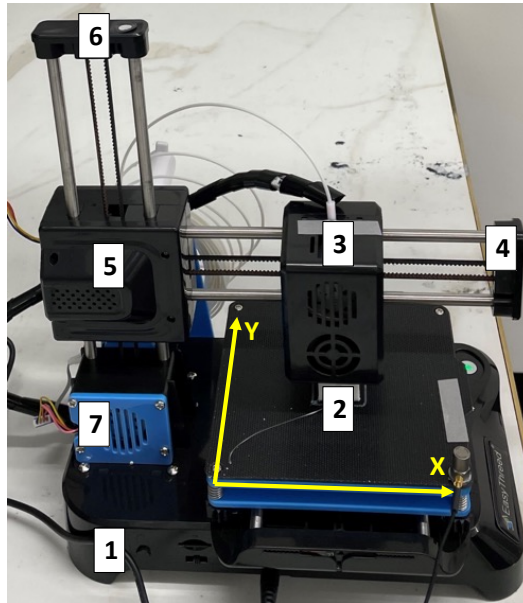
Primary components of an EasyThread K7 3D printer: 1. Base frame. 2. Build plate. 3. Print head. 4. x-axis gantry. 5. x-axis motor housing. 6. z-axis gantry. 7. z-axis motor housing.
